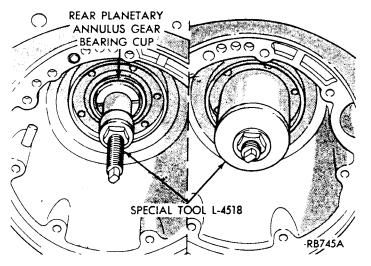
Remove Rear Planetary Annulus Gear Bearing Cup
